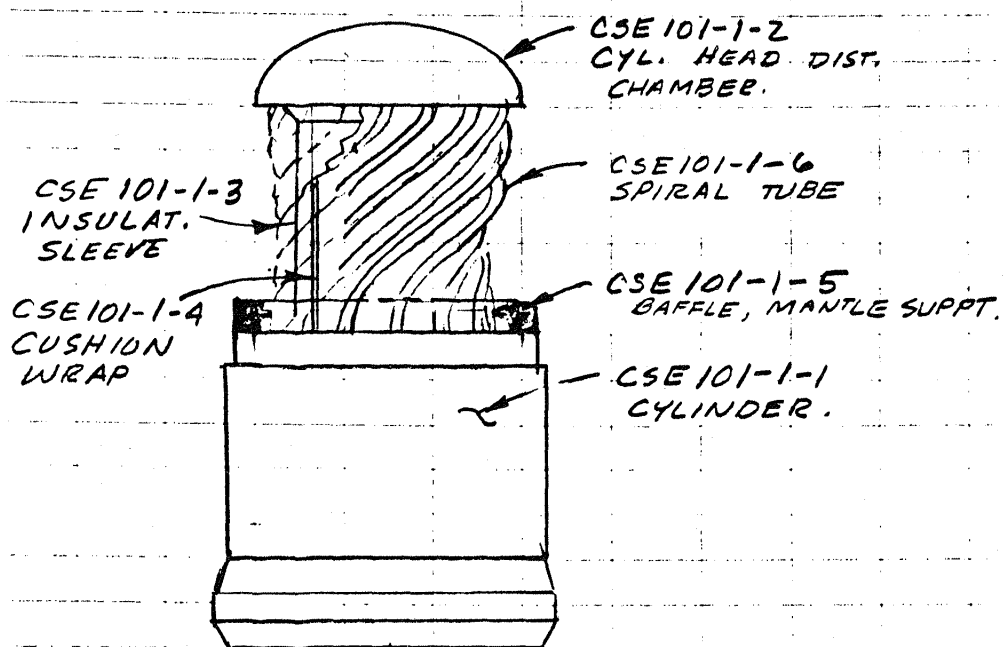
CSE 101-1 CYLINDER HEATER HEAD ASSEMBLY
